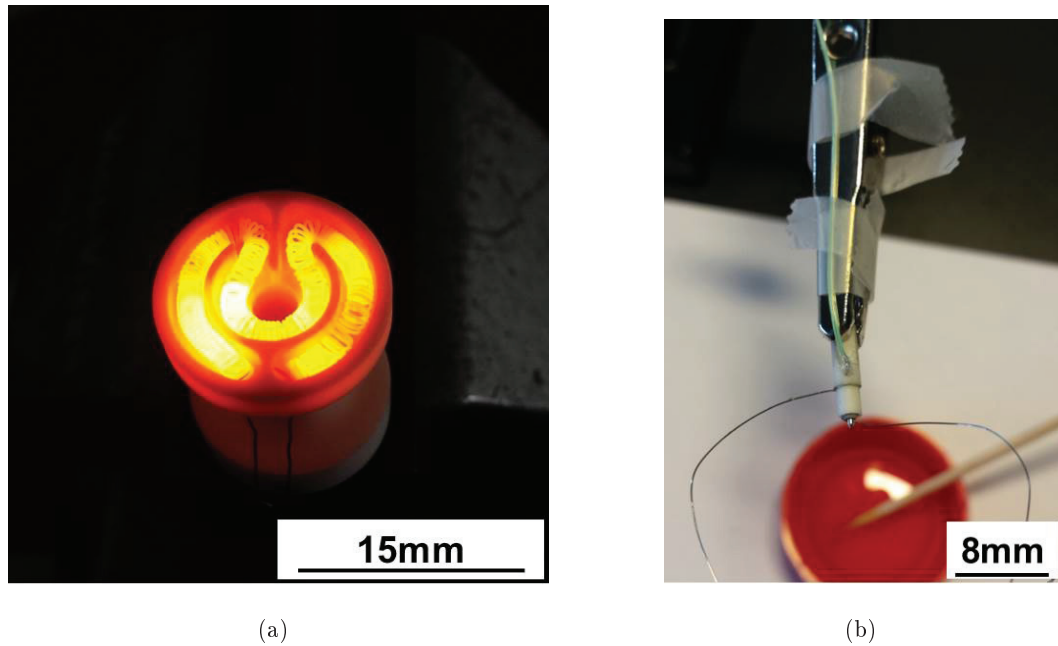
Heat treatment of resistive wire during peg heater assembly (a) and diamond tip during assembly with thermocouple cemented into the ceramic shaft (b).
